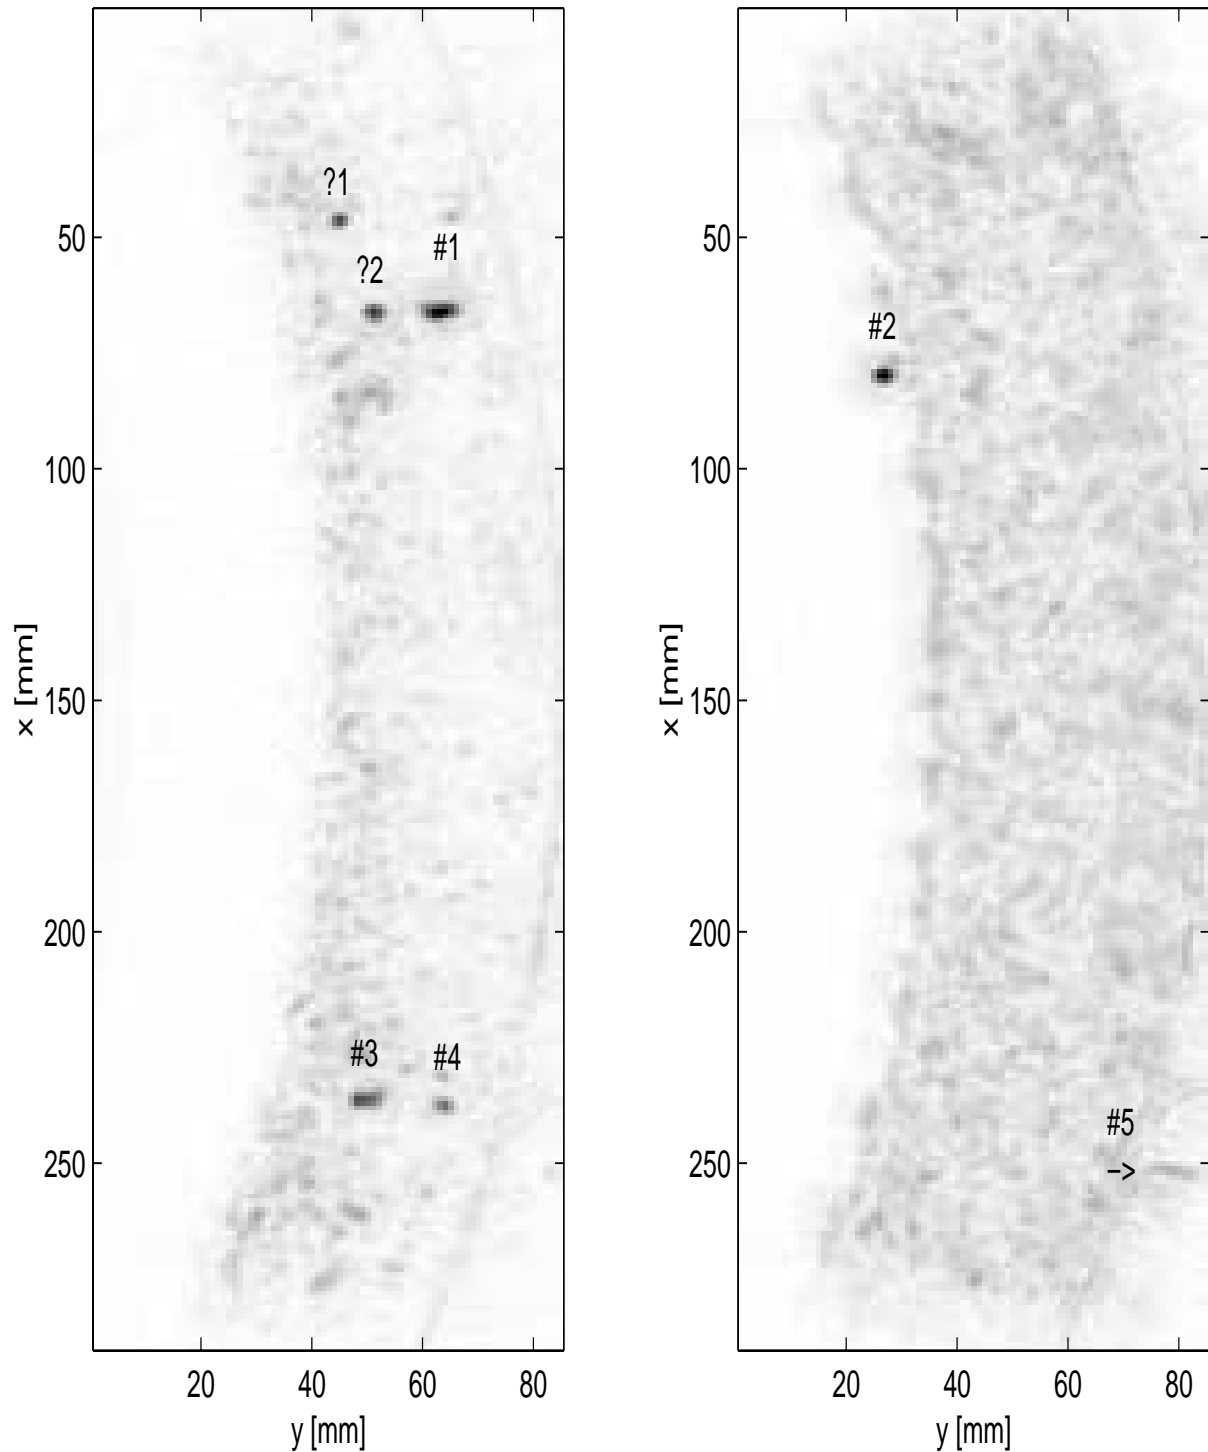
Ultrasonic inspection of copper block W123-3 using the 2.26 transducer. C-scans of copper block W123-3 with the gates located across (a) the upper boundary (HAZ/FZ) and (b) the lower boundary (HAZ/FZ) of the EB weld, respectively.
